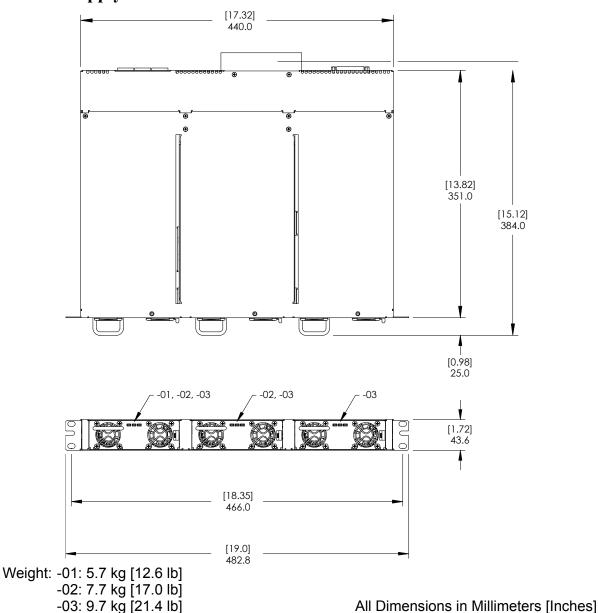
QS 100 Power Supply Mechanical Drawing
